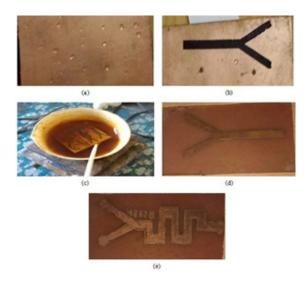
Mold preparation using PCB [a] Clean PCB, [b] channel patterning, [c] PCB Etching, [d] Remove the resist, [e] Desired channel mold.
